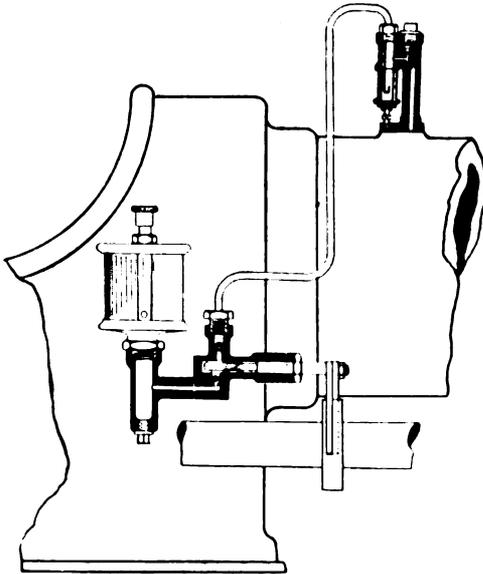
Lubricating Oil Pump for Gas Engine cylinder.
